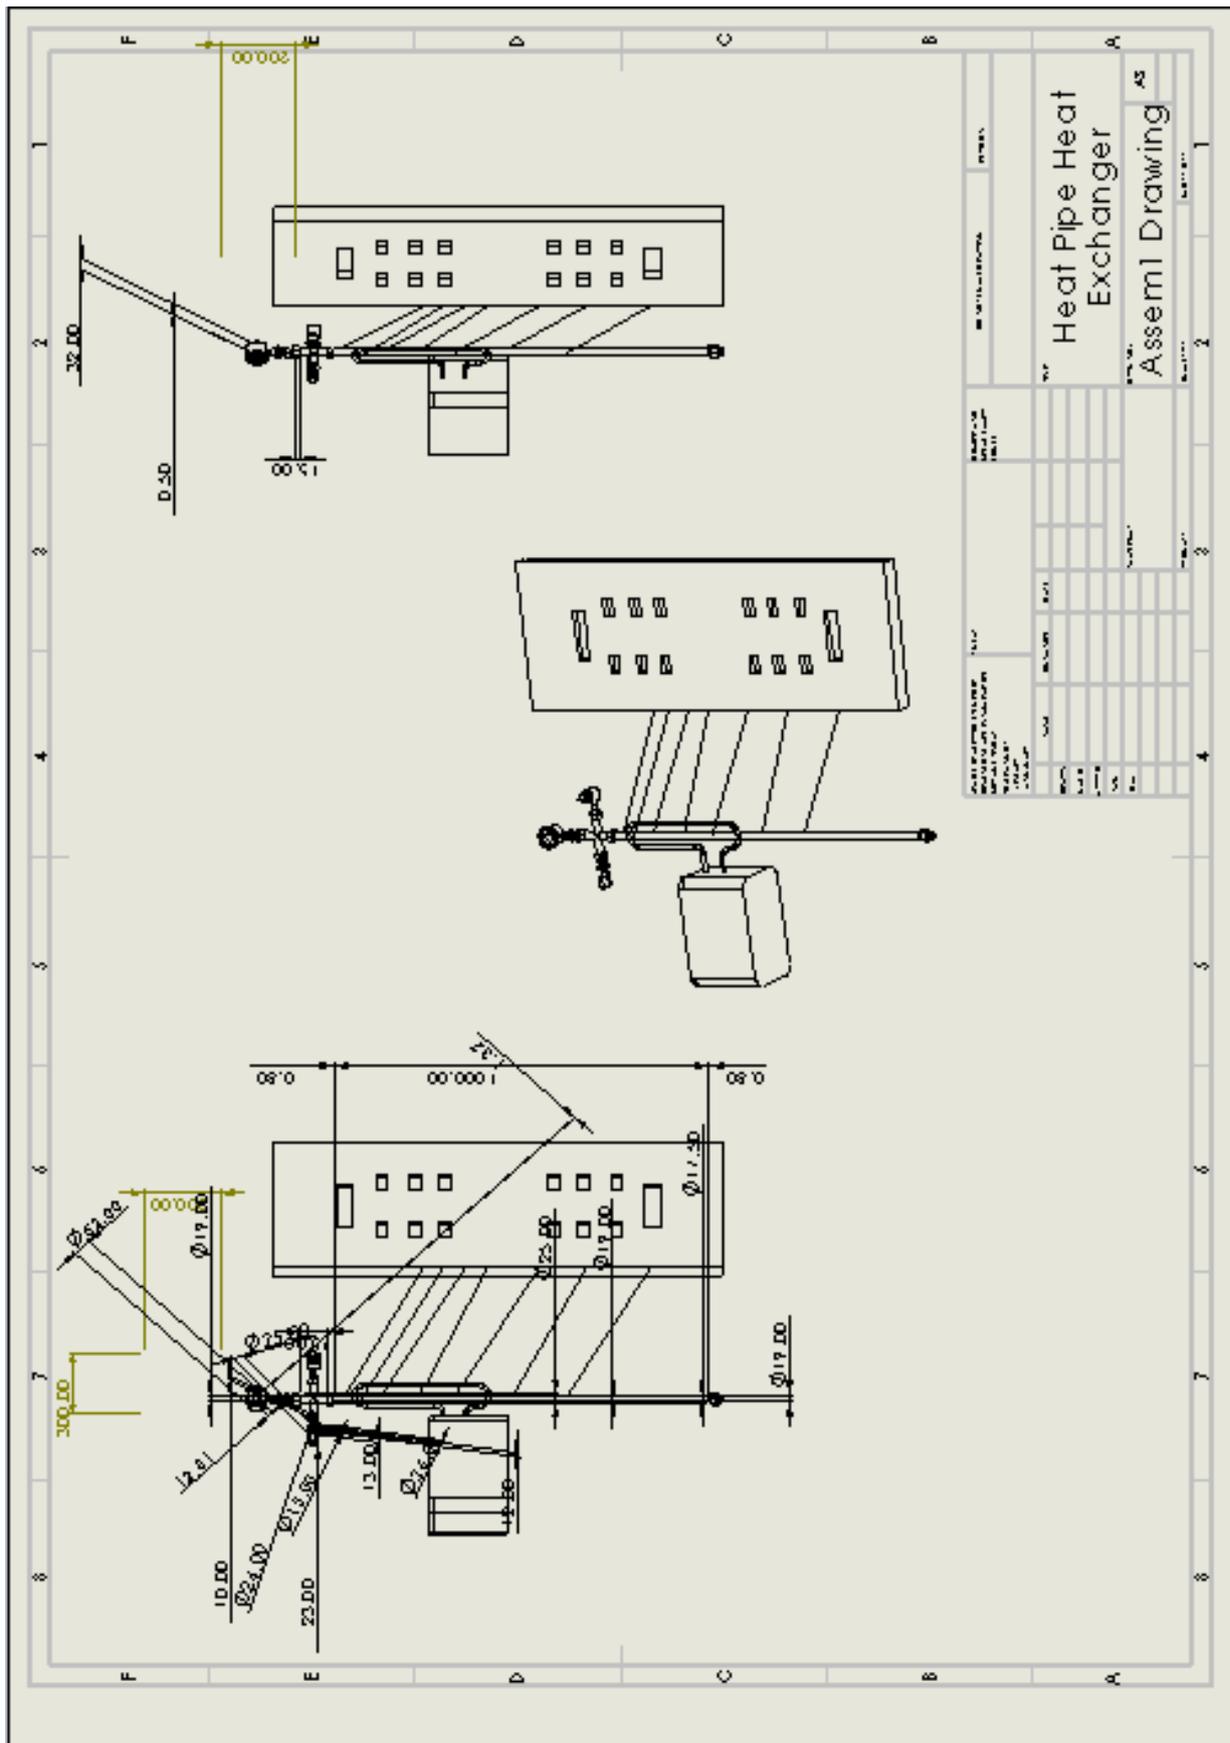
(e): Exploded View of Prototype Thermosyphon
